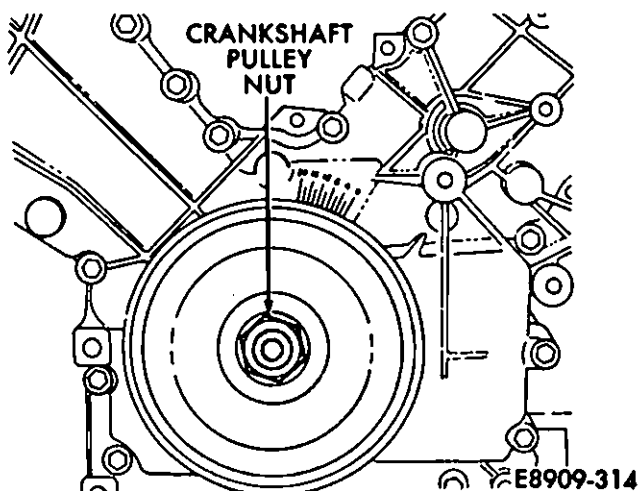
Loctite 271 on Crankshaft Pulley Nut
